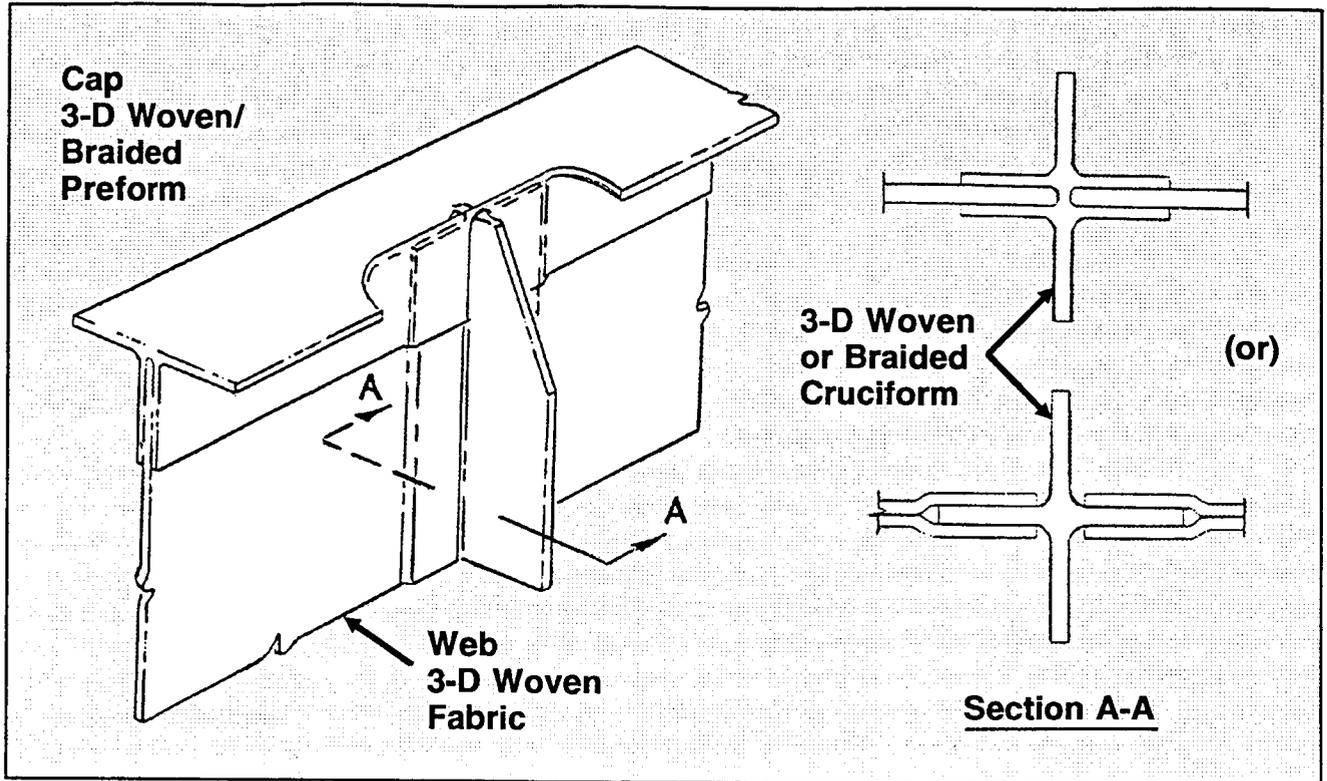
Configuration for Underfloor Frame Built with Woven and Braided Preforms
